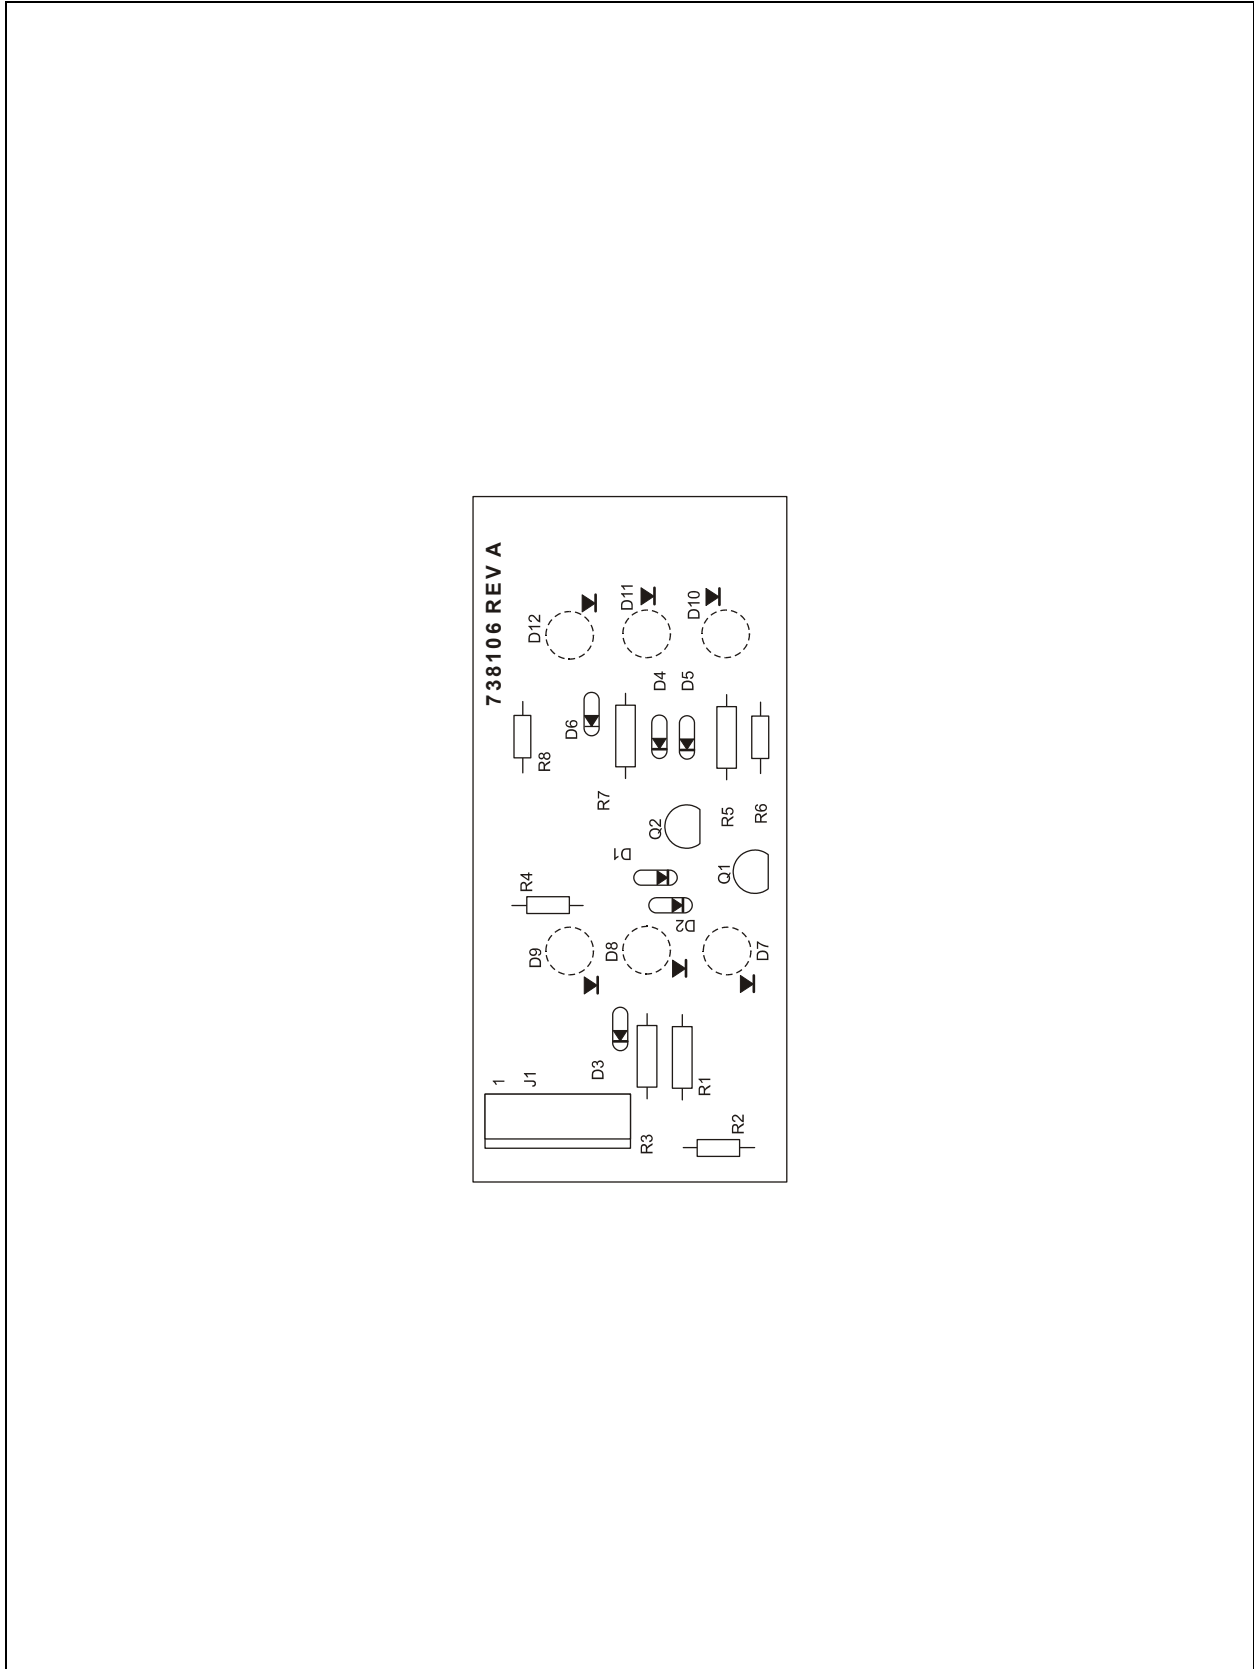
Display Board Component Locations (738106 Rev. A)
